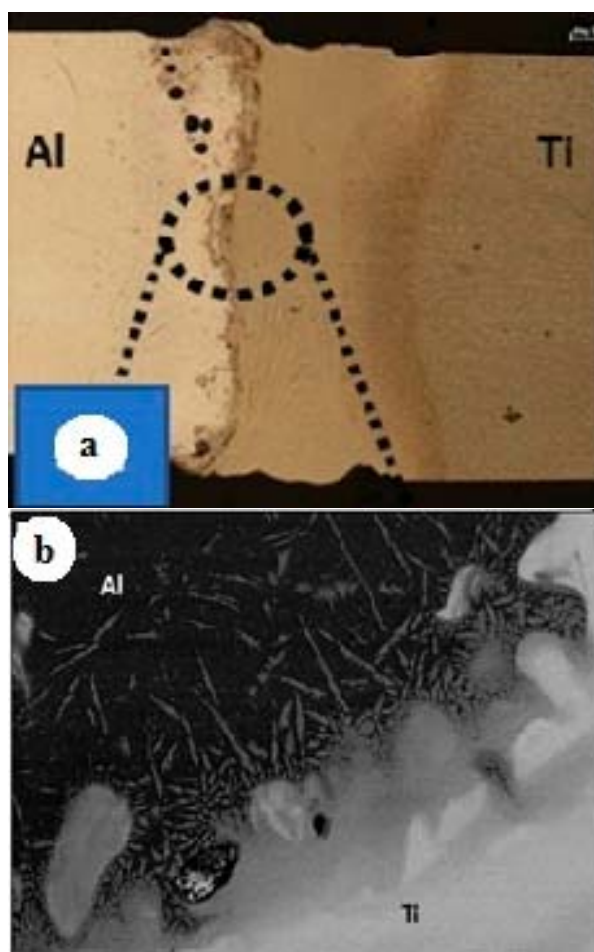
(a) Weldment cross section and (b) IMC layer
